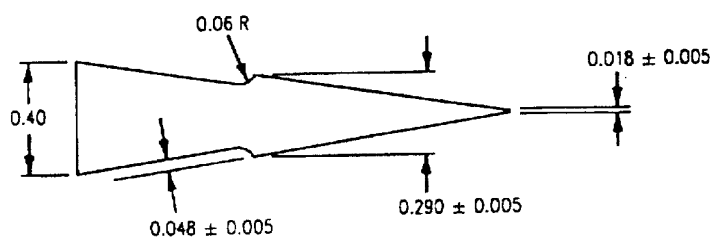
Inboard Aft Closure Rib and Skin Damage Repair (Sheet 8)
